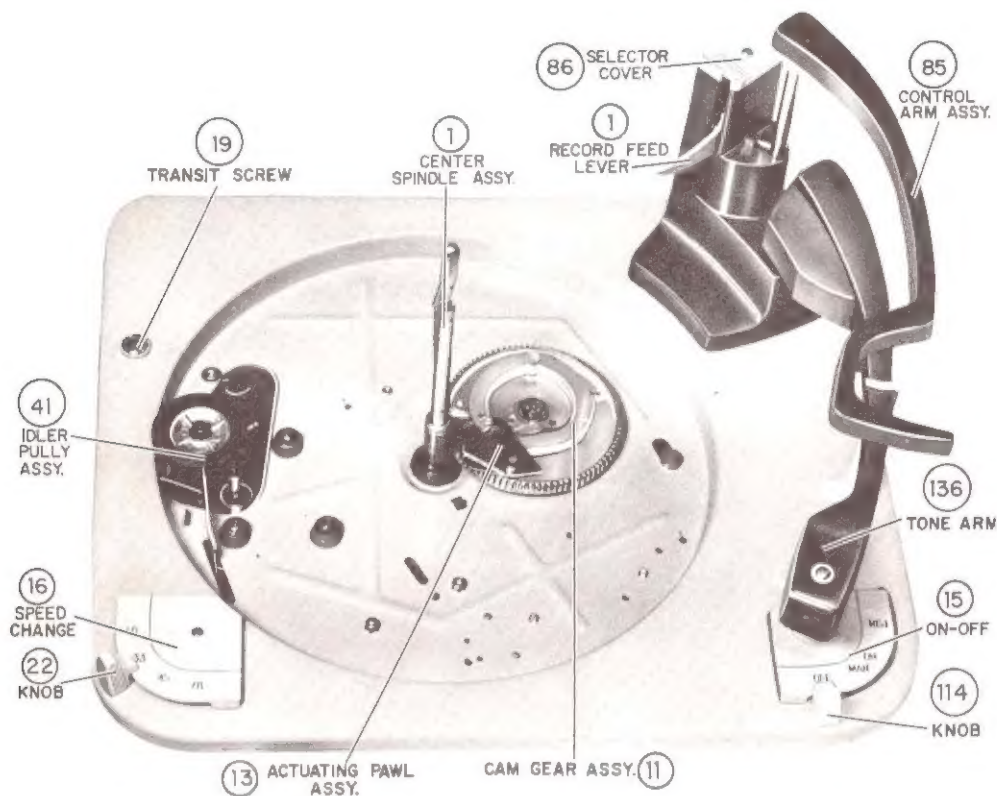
TOP VIEW OF CHANGER, TURNTABLE REMOVED
